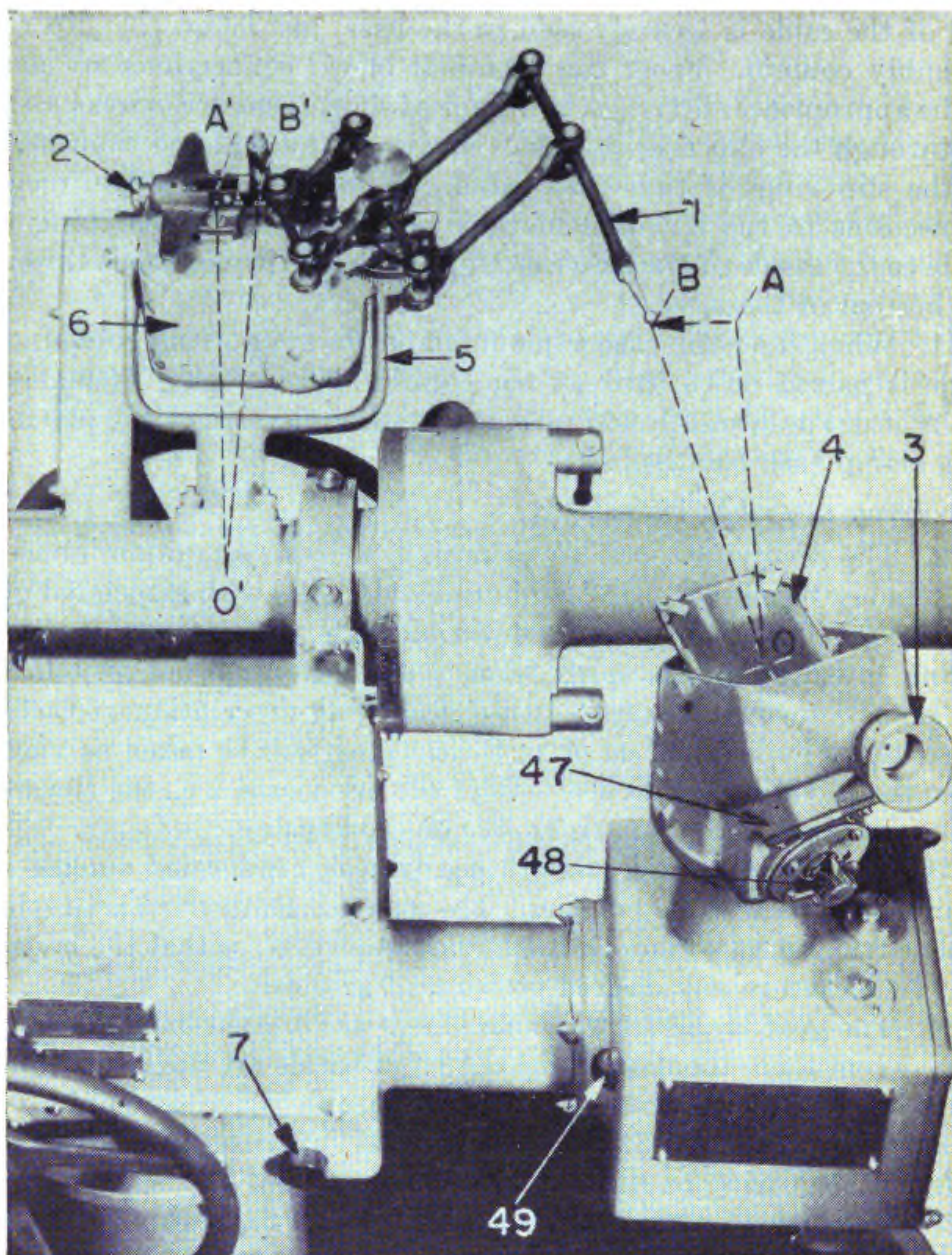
PANTOGRAPH DRIVE ASSEMBLY.
